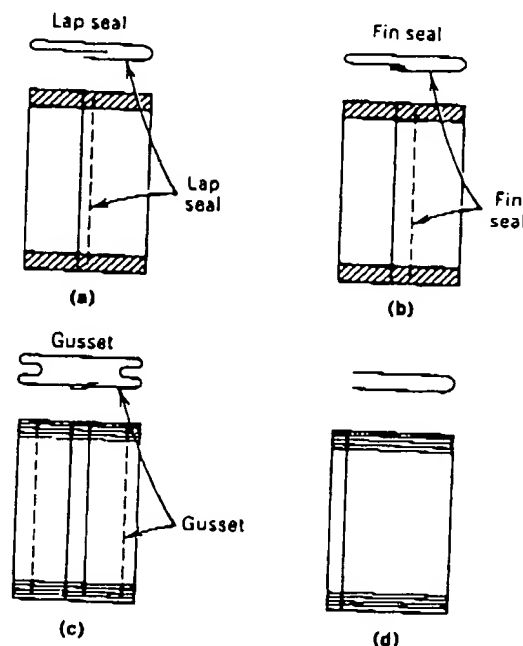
Selected package styles on VFFS machinery. (a) and (b), Pillow style; (c), gusseted style; (d) three-sided seal.
